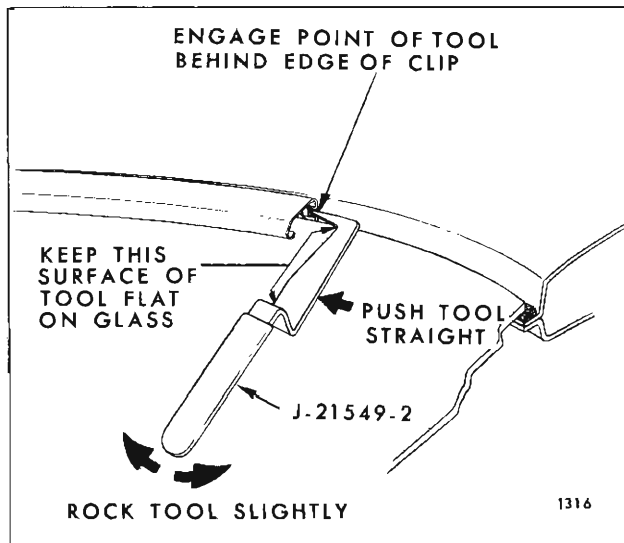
C3—Reveal Molding Clip Disengagement and Tool
